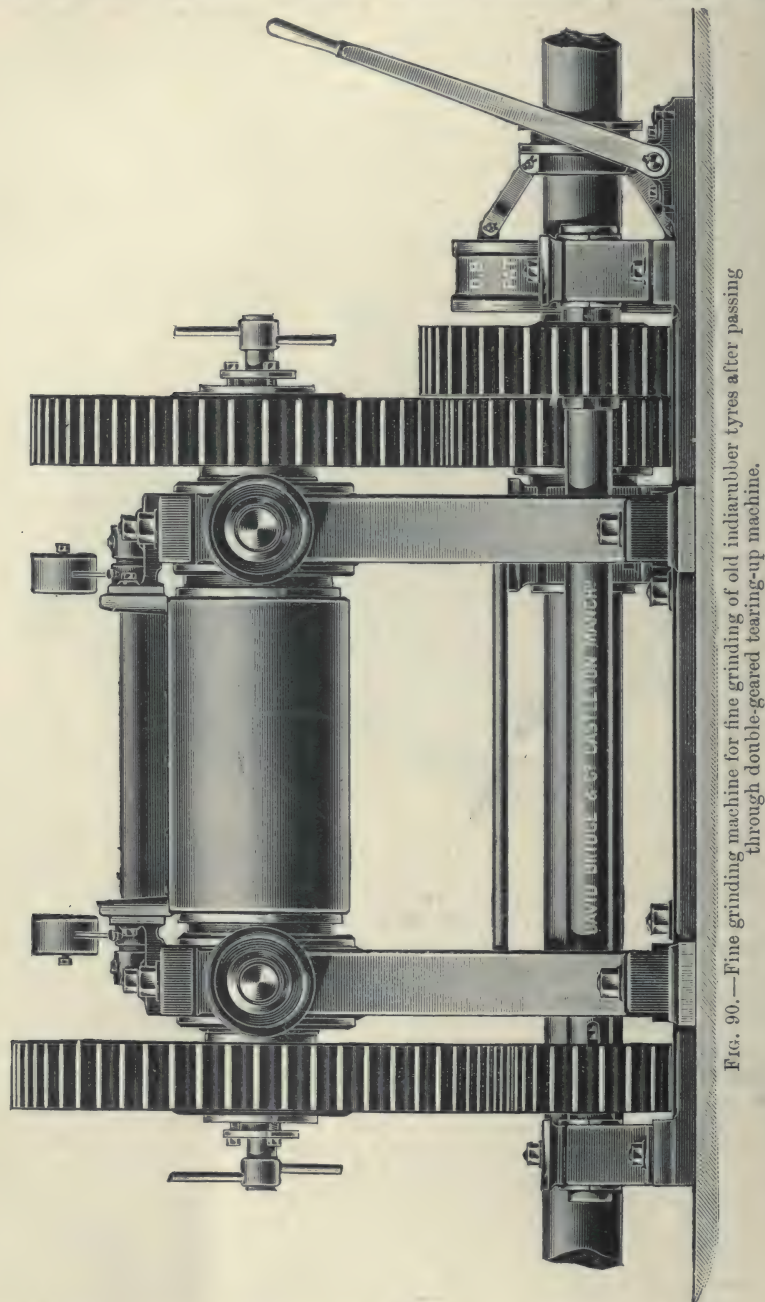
Fine grinding machine for fine grinding of old indiarubber tyres after passing through double-gear tearing-up machine.
